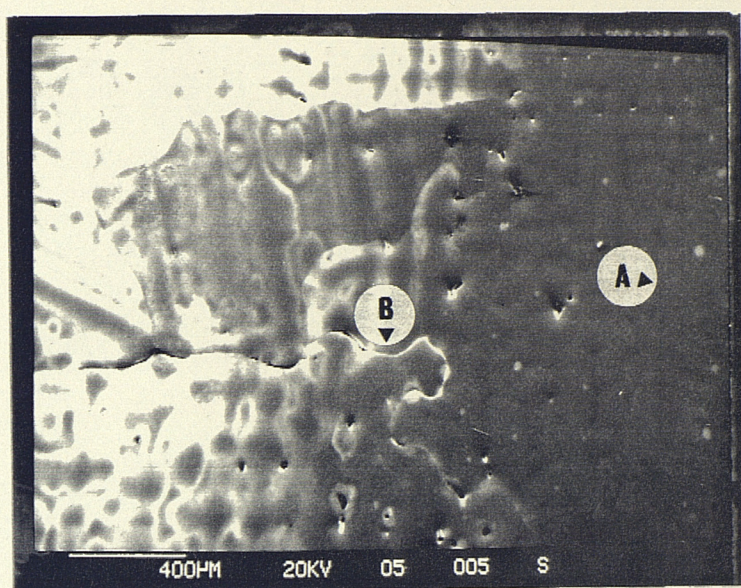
Weld induced crack in WBL-3794.
